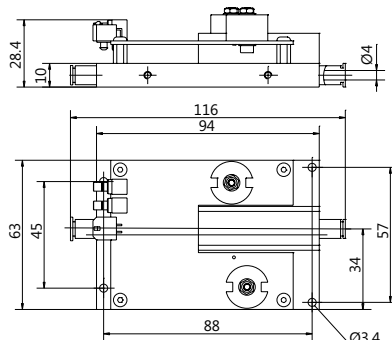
Outline drawing of DPS/DPD series driver with general purpose pad
